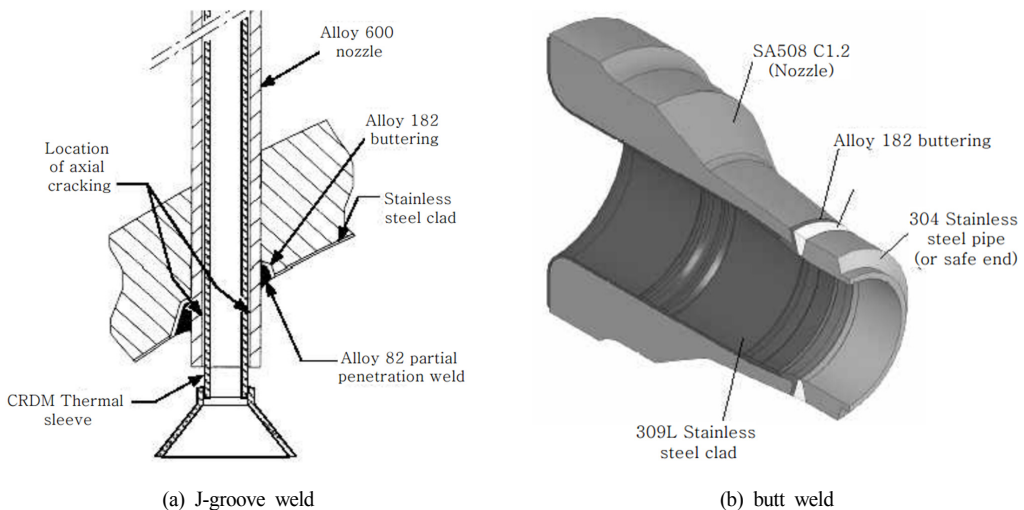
Dissimilar Metal Welds in Reactor Coolant System
